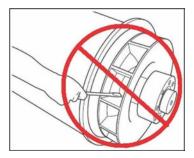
DO NOT ROTATE THE ALTERNATOR ROTOR USING THE COOLING FAN VANES.
